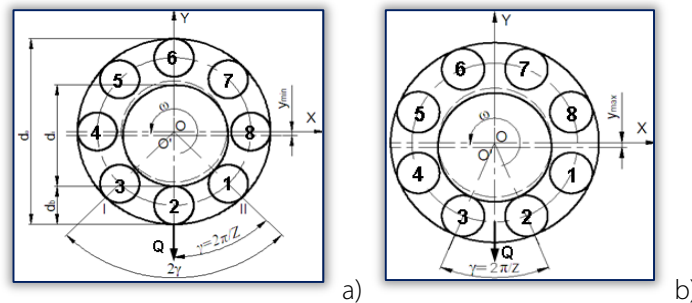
The extreme rotor positions in the rolling element bearing [10]
